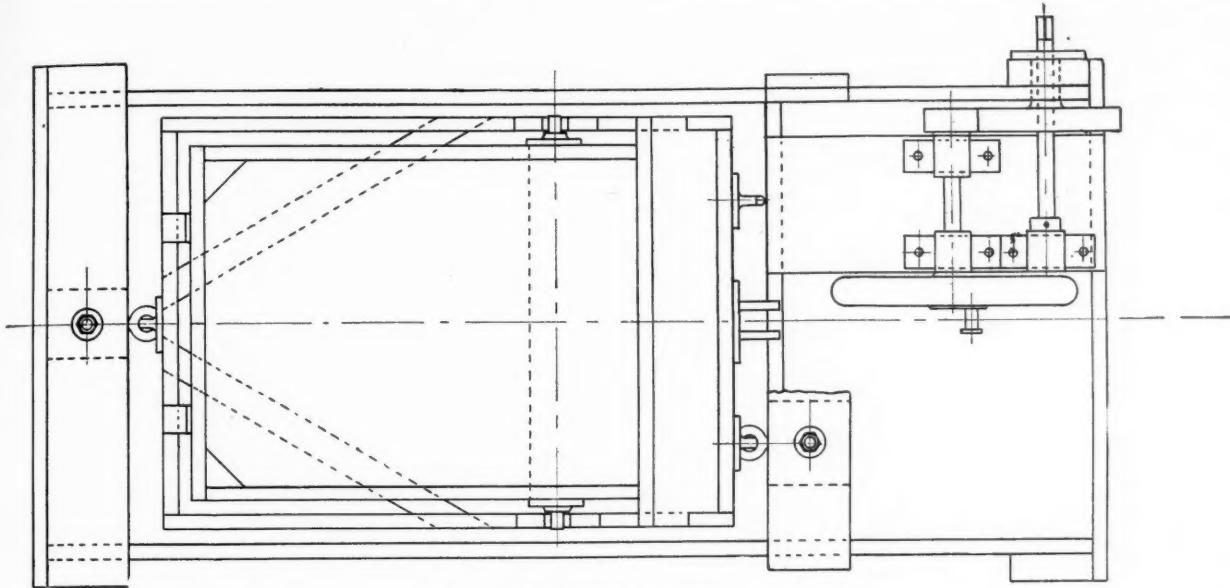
SAND-SIFTING MACHINE—PLAN VIEW.
